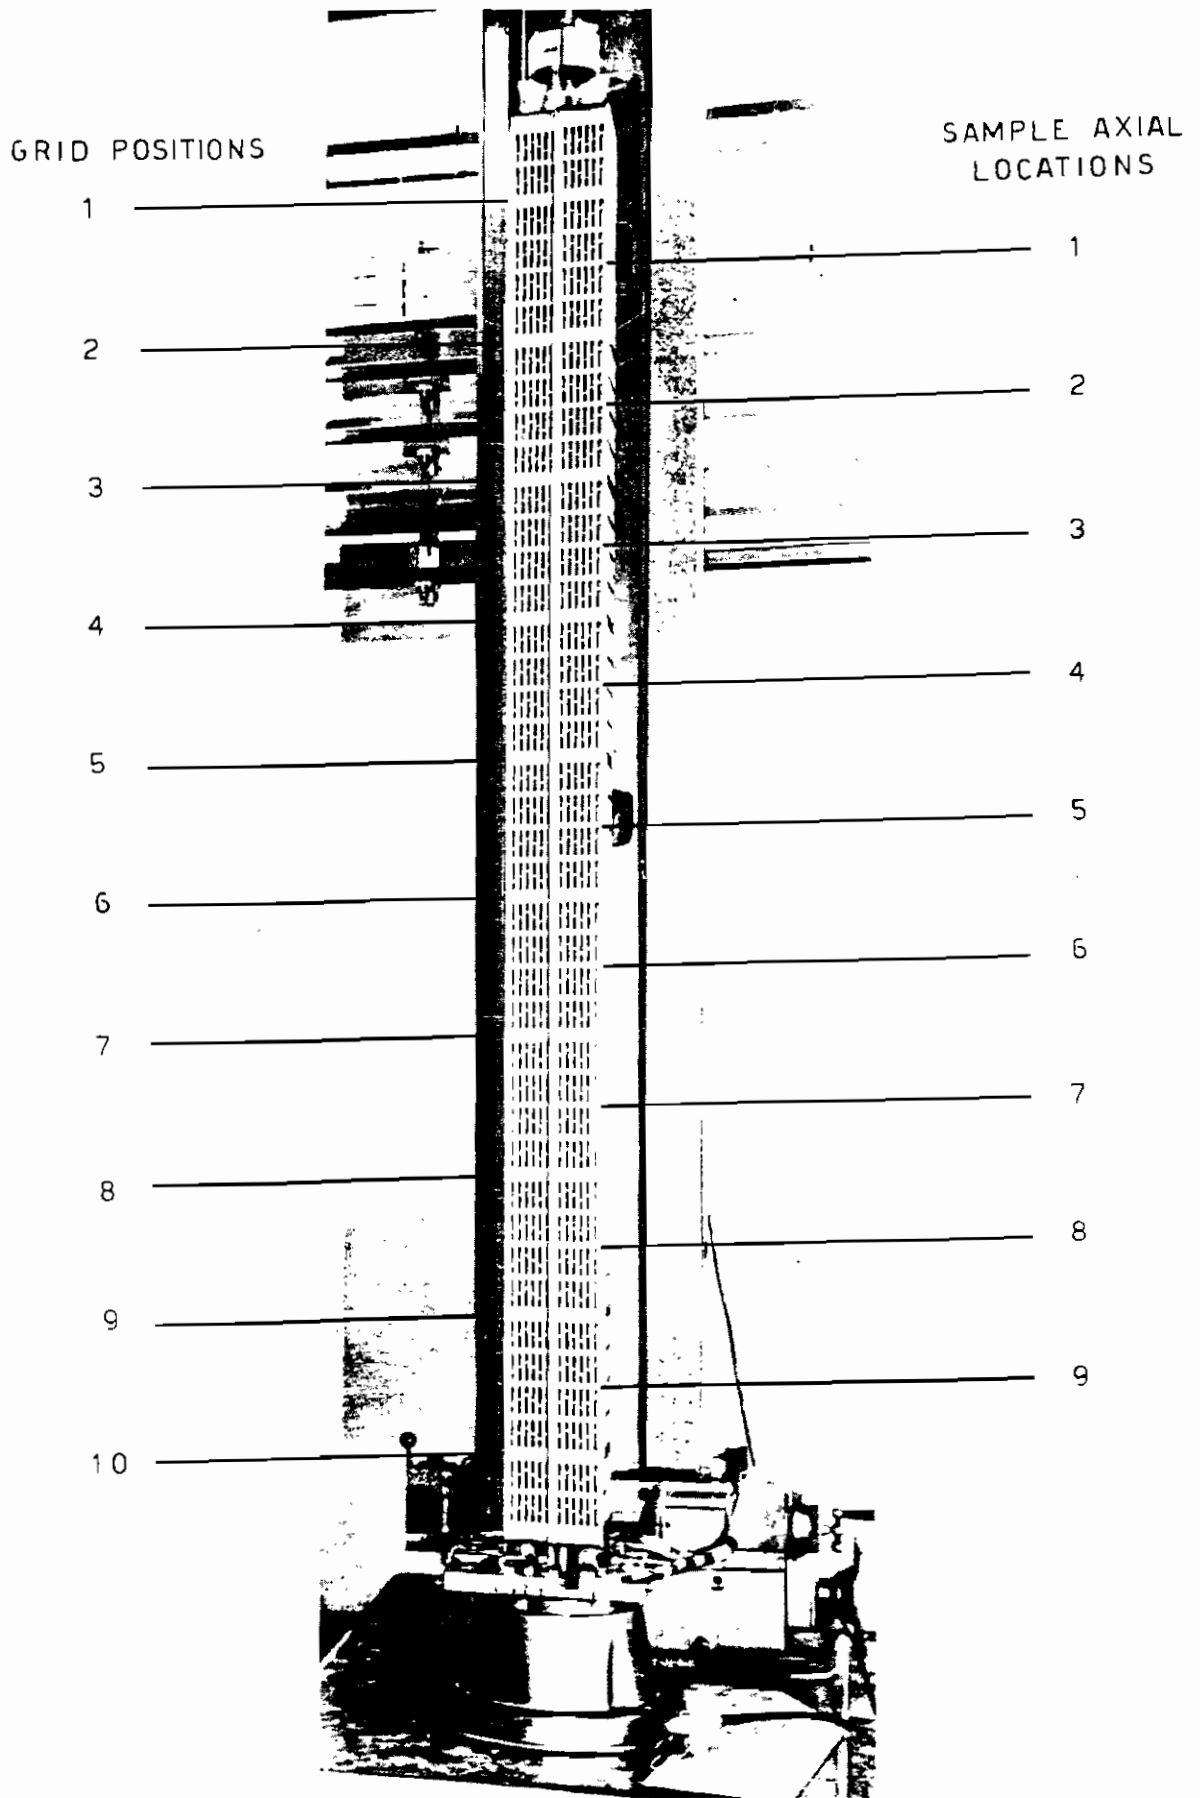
Fuel assembly showing positions of grids and axial locations of samples examined.
